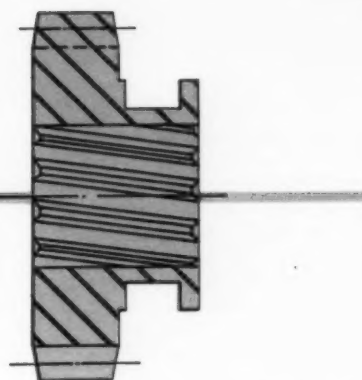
Original design of sliding gear has helical teeth and shifts on a helical spline
